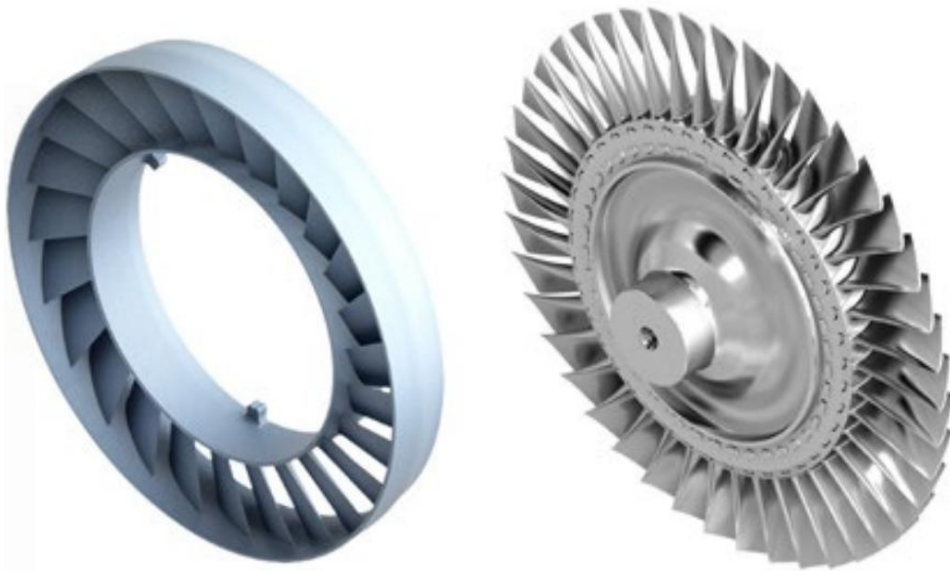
Turbocharger nozzle ring and turbine wheel. /35/
